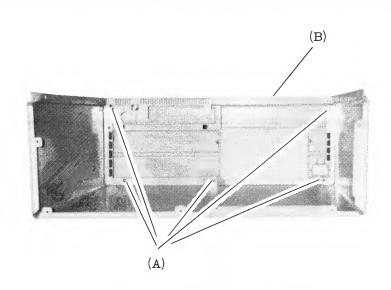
FRONT PANEL REMOVAL/REPLACEMENT
